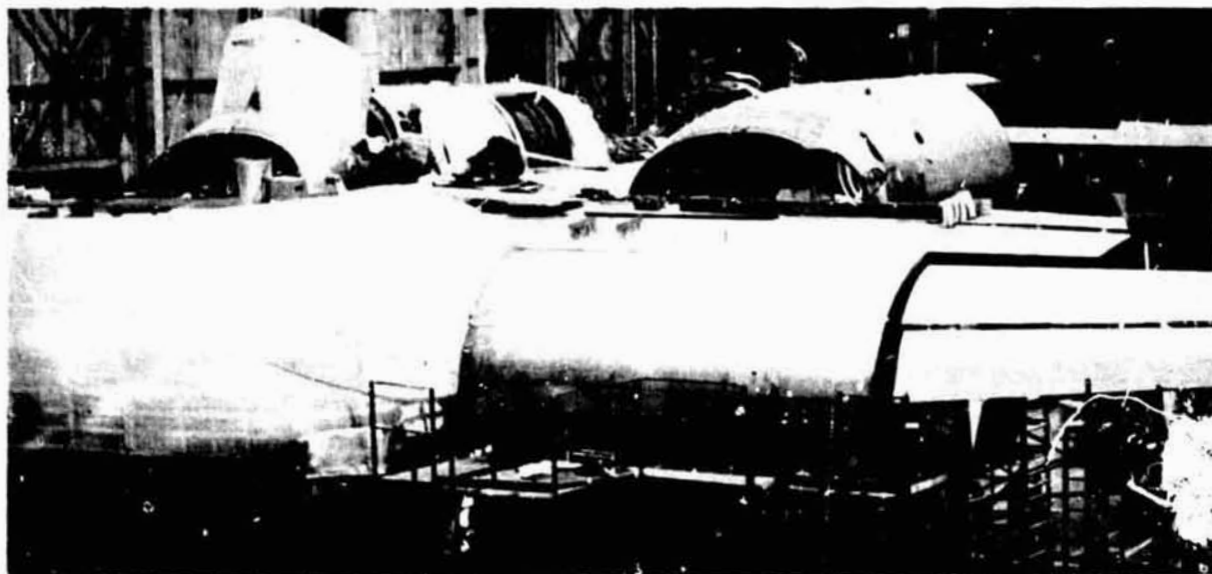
YC-14 prototype no. 1 - final assembly, February 1976.
